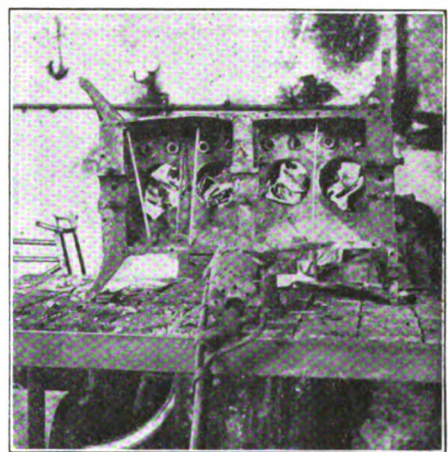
SHOWING THE FILLER RODS BRACING THE BROKEN PARTS
